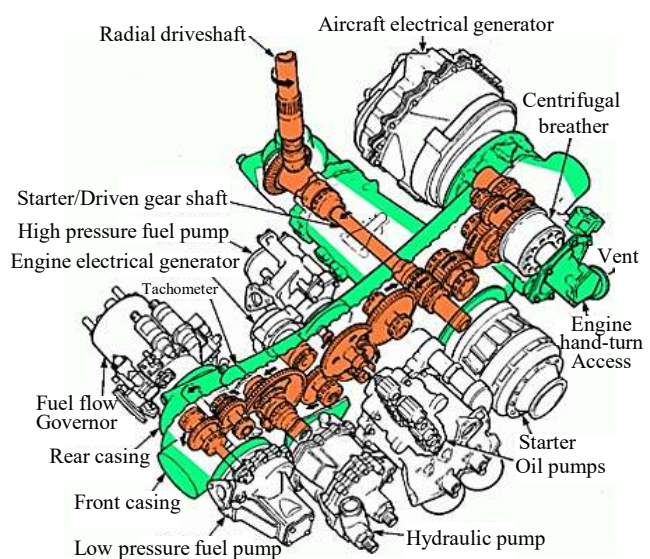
Gears and equipment in the accessory gearbox [3]
